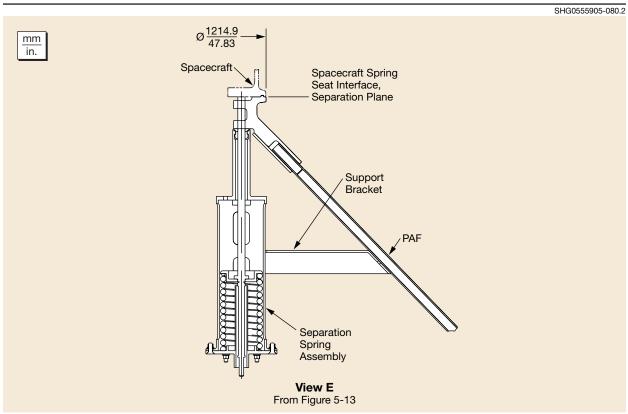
1194-5 PAF Separation Spring Assembly
